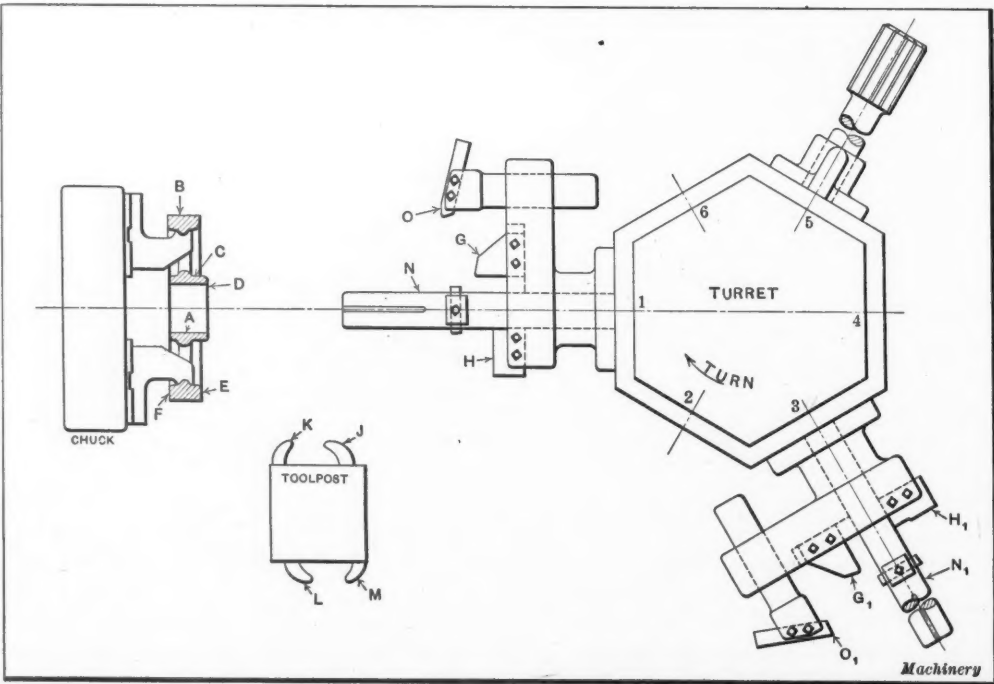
Tool Lay-out for finishing Spur Gear shown in Fig. 10
